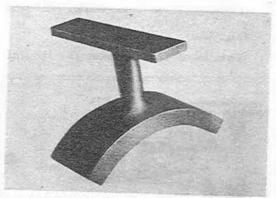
Transfer low speed gear holding tool 09313-60010.
